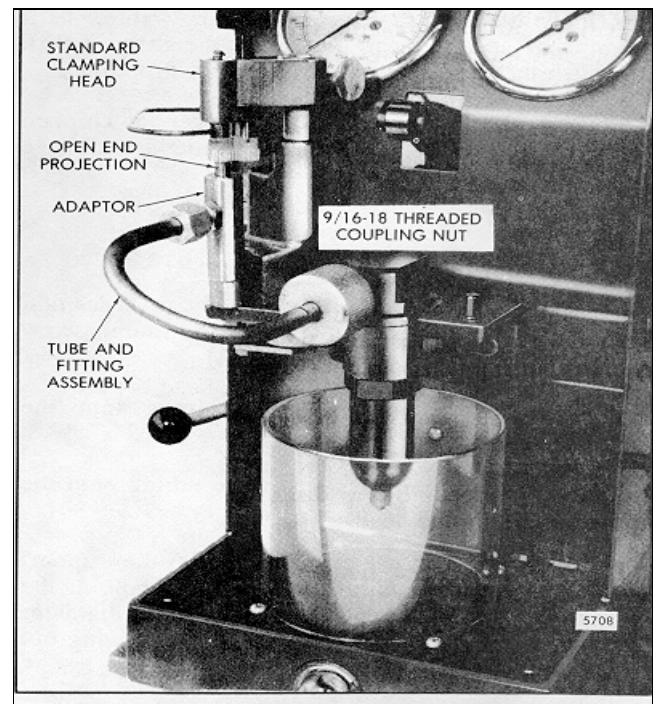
Adapter and Tube Assembly on Injector Tester J 23010
